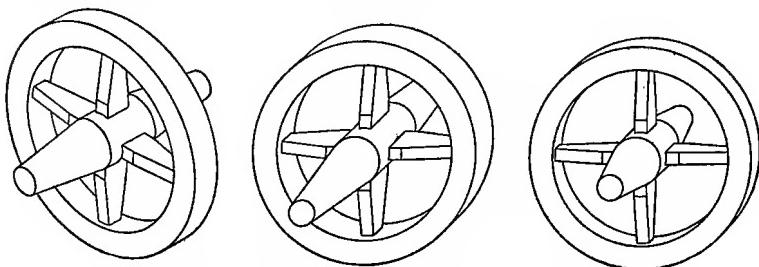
Isometric, oblique and cabinet drawing compared.
